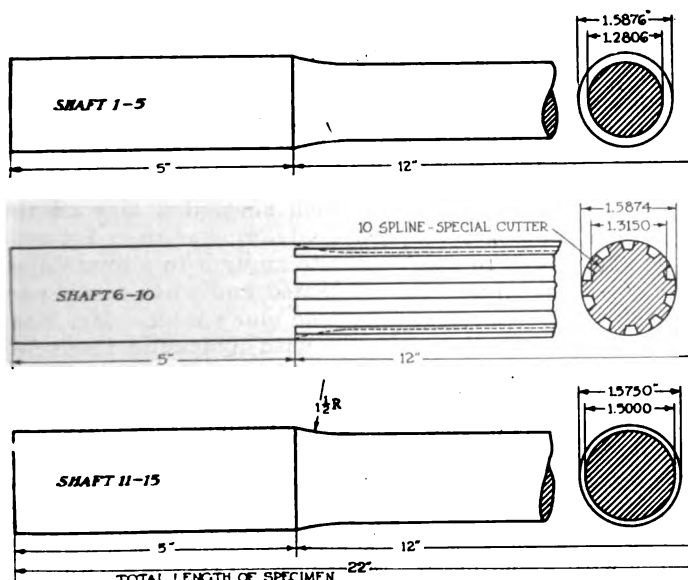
Dimensions of test pieces used in splined shaft torsion tests
